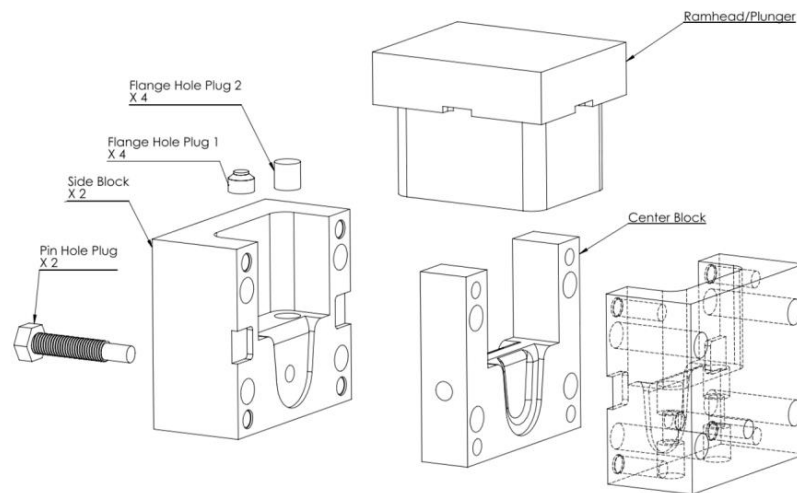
Compression molding tool used to fabricate the pin bracket [10].
